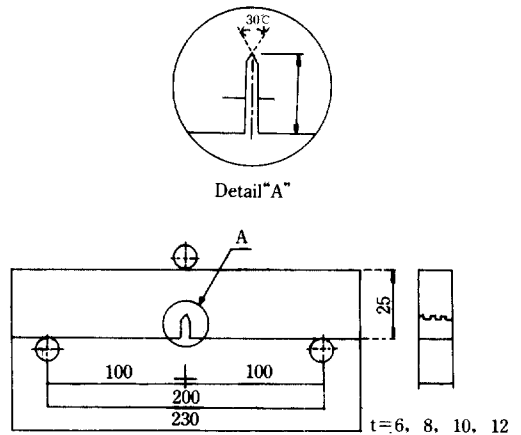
Specimen dimension and notch position for corrosion test(unit : mm)
